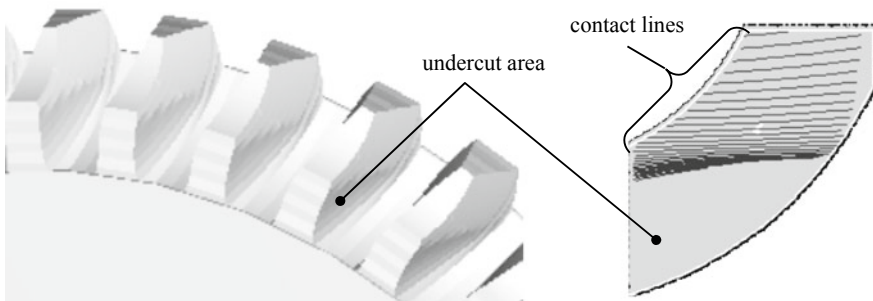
Undercutting of gearwheel teeth in the QN-gear
